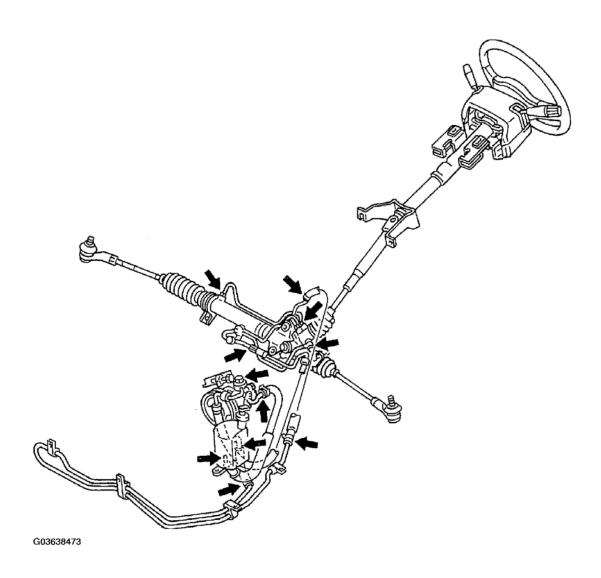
Identifying Fluid Leakage Areas Courtesy of MAZDA MOTORS CORP.
